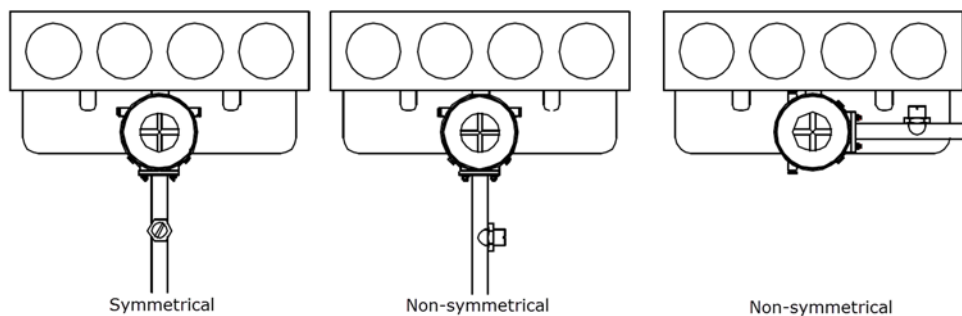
Symmetrical Mounting of Lean Burn Engine Components
